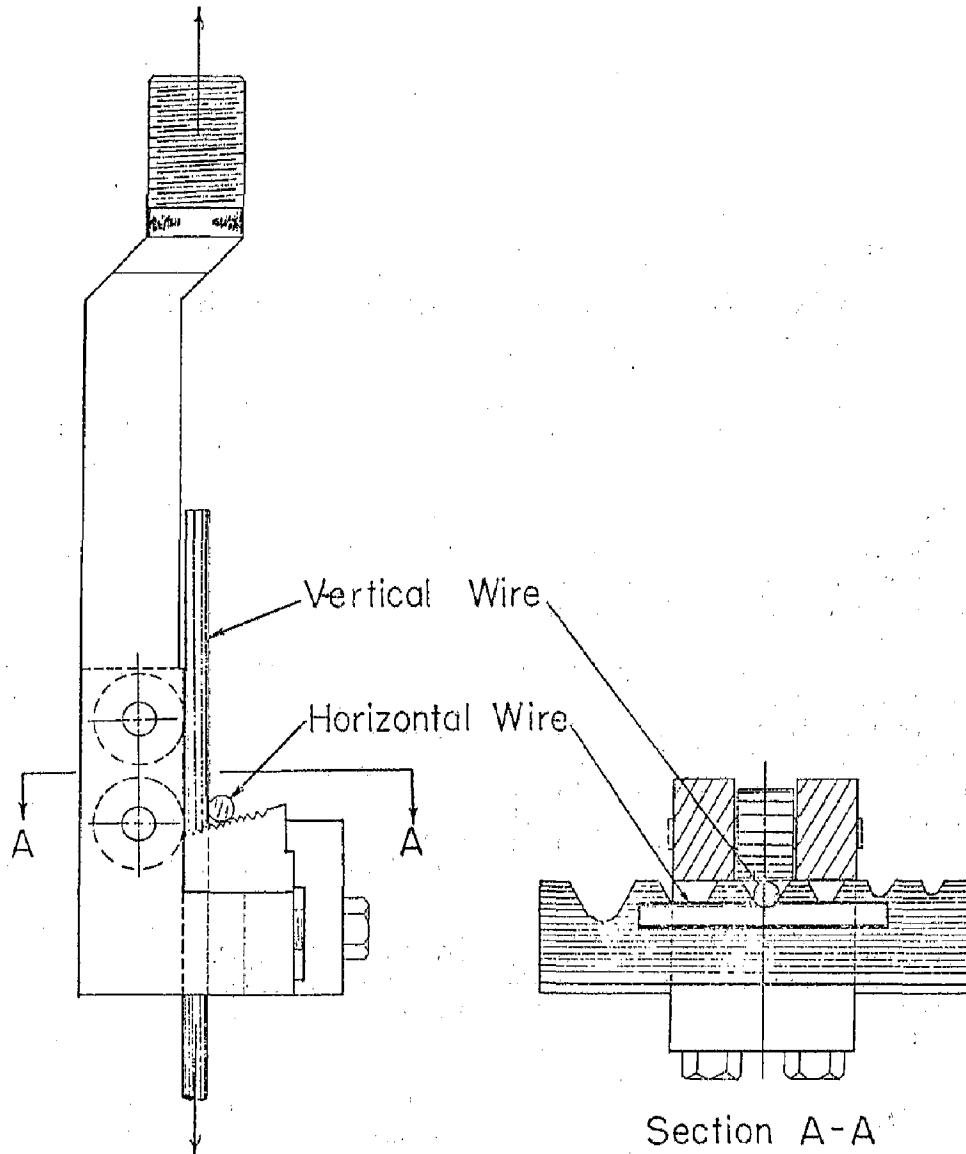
Welded Wire Fabric Weld Tester.
